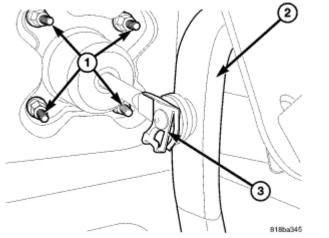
Identifying Retainer Clip, Pedal & Booster Mounting Nuts Courtesy of CHRYSLER LLC
